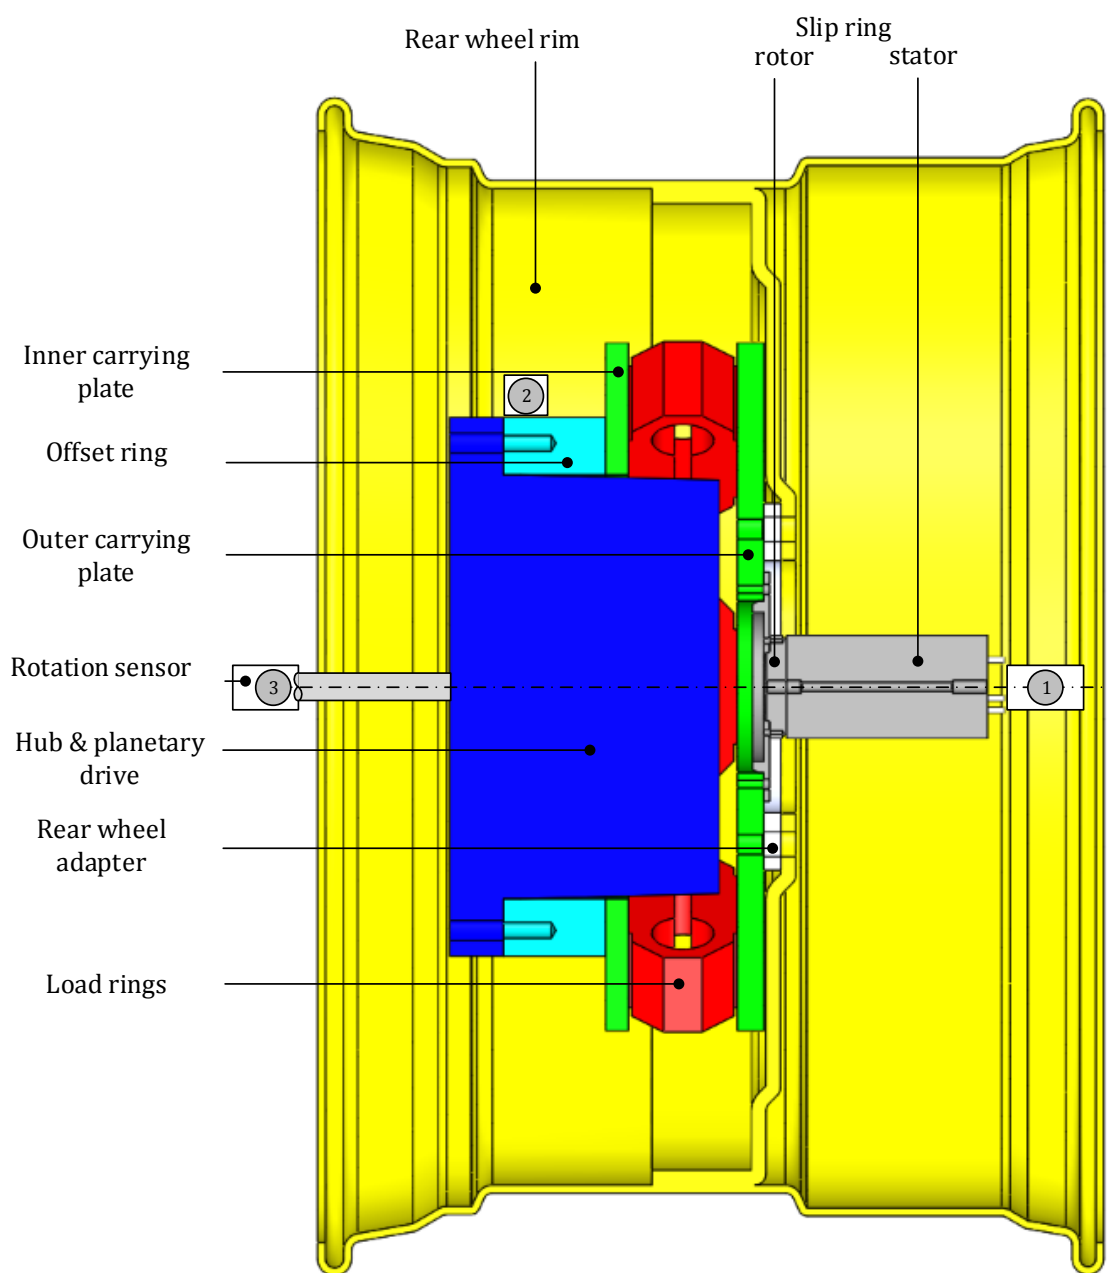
The design of Wheel Force & Torque Measurement Device
